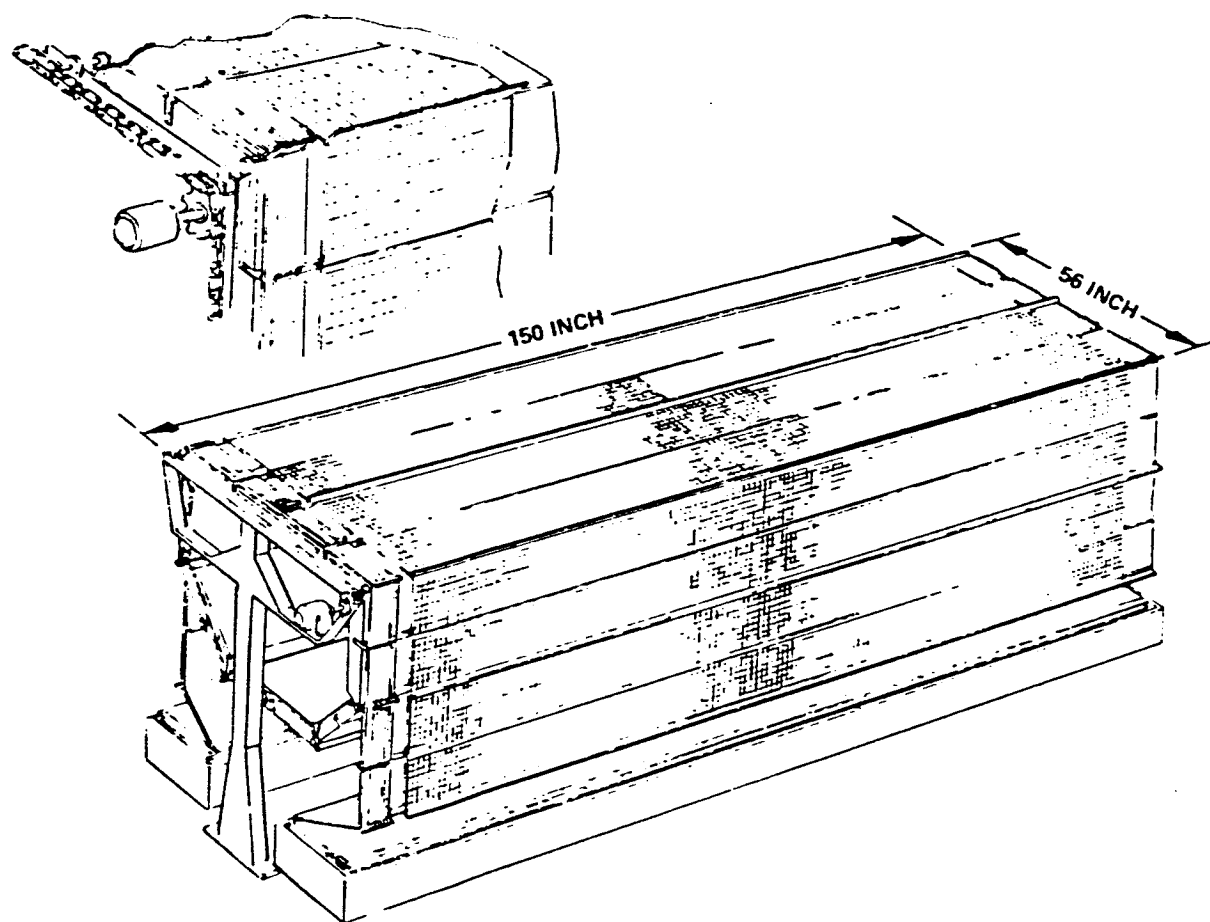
Cell Laydown Fixture (Concept Shown)
